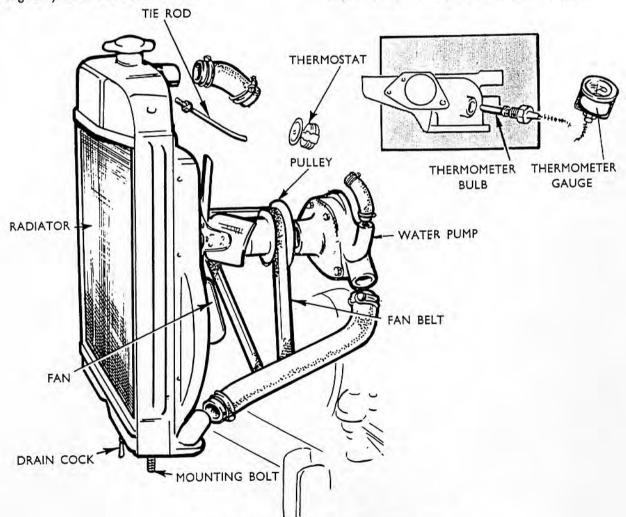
THE COOLING SYSTEM (87 mm. and 23C Engines).
